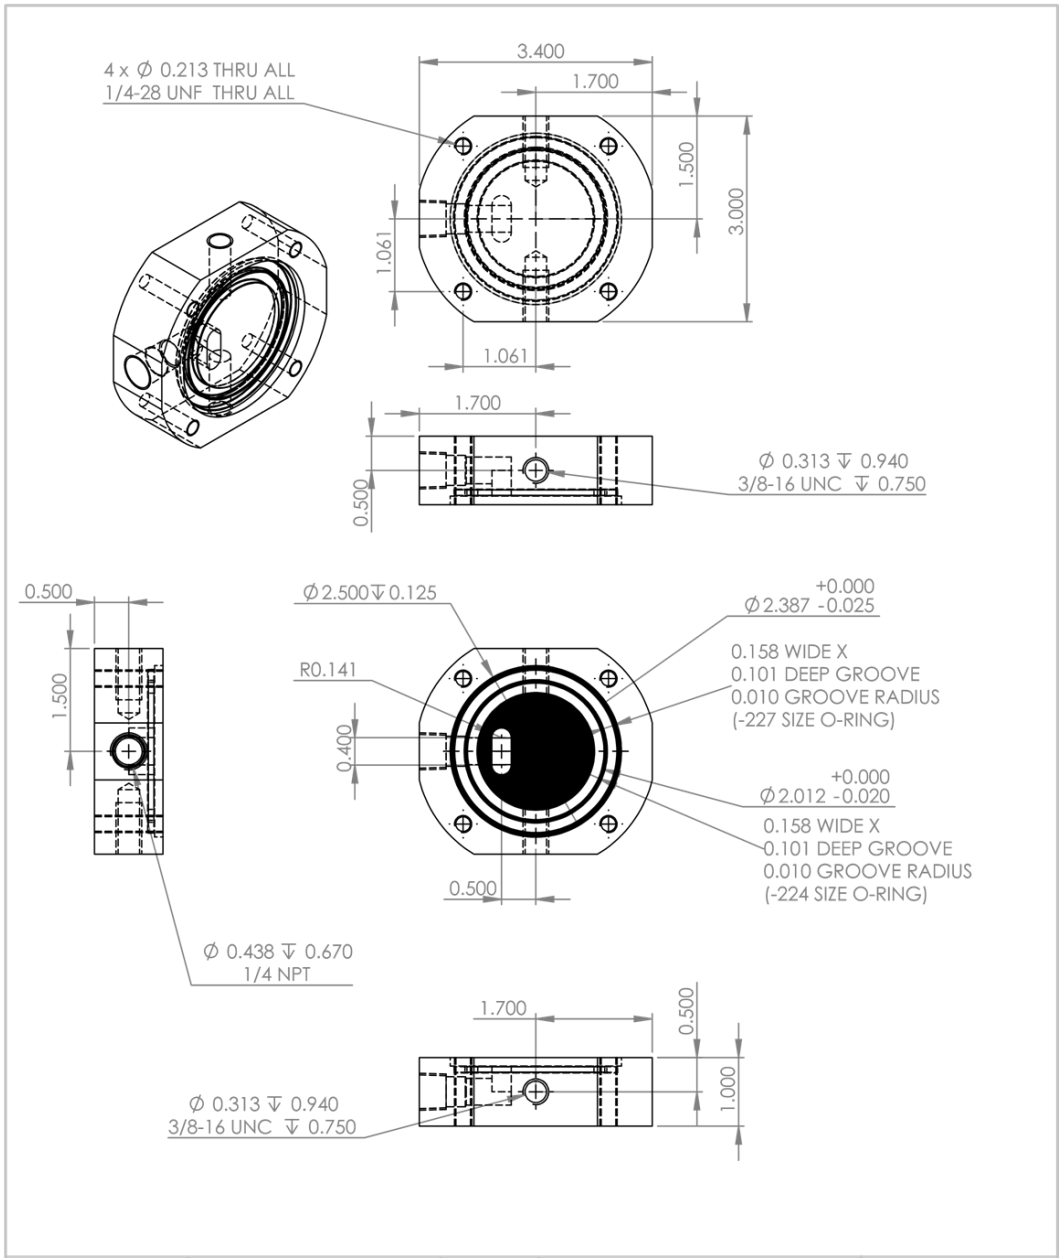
Pressure test chamber – bottom disk CAD drawing.
